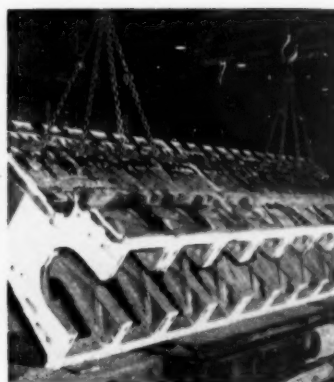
Two special chain assemblies used to turn Diesel engine blocks.
